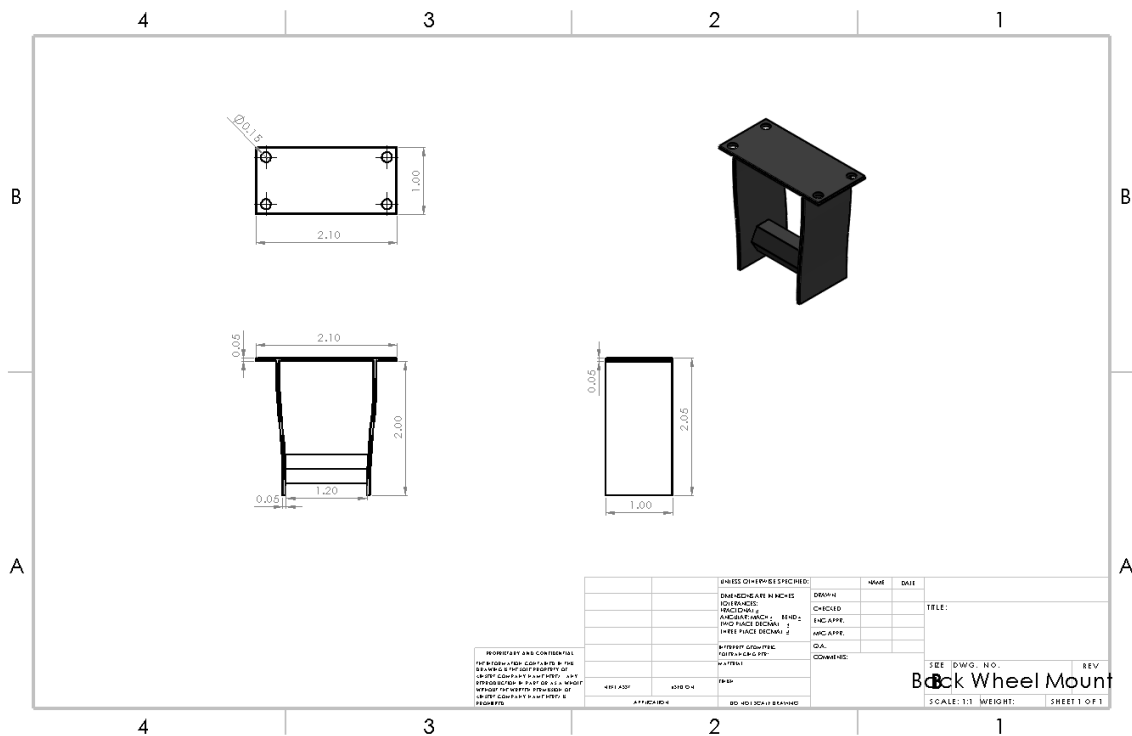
The sketch and dimensions of the back-wheel mount.
